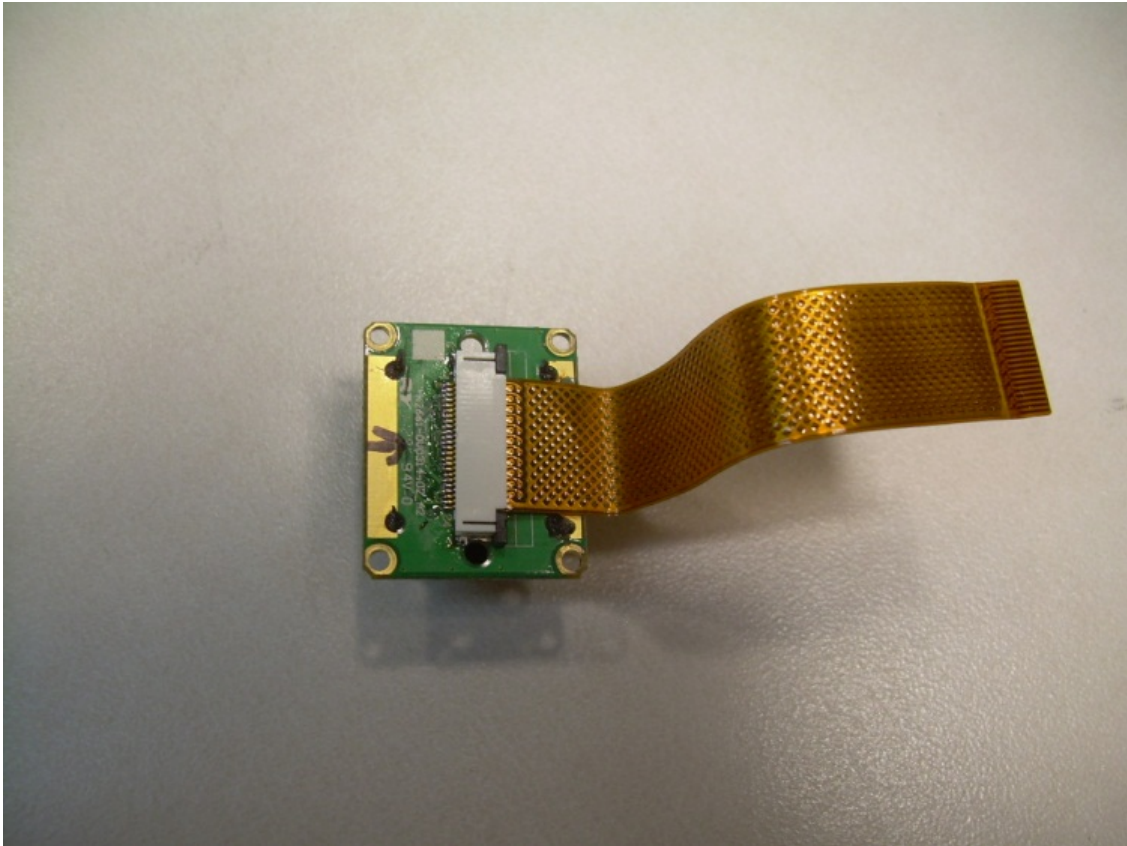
View of the Trace Side of the LED/Switch PCB
